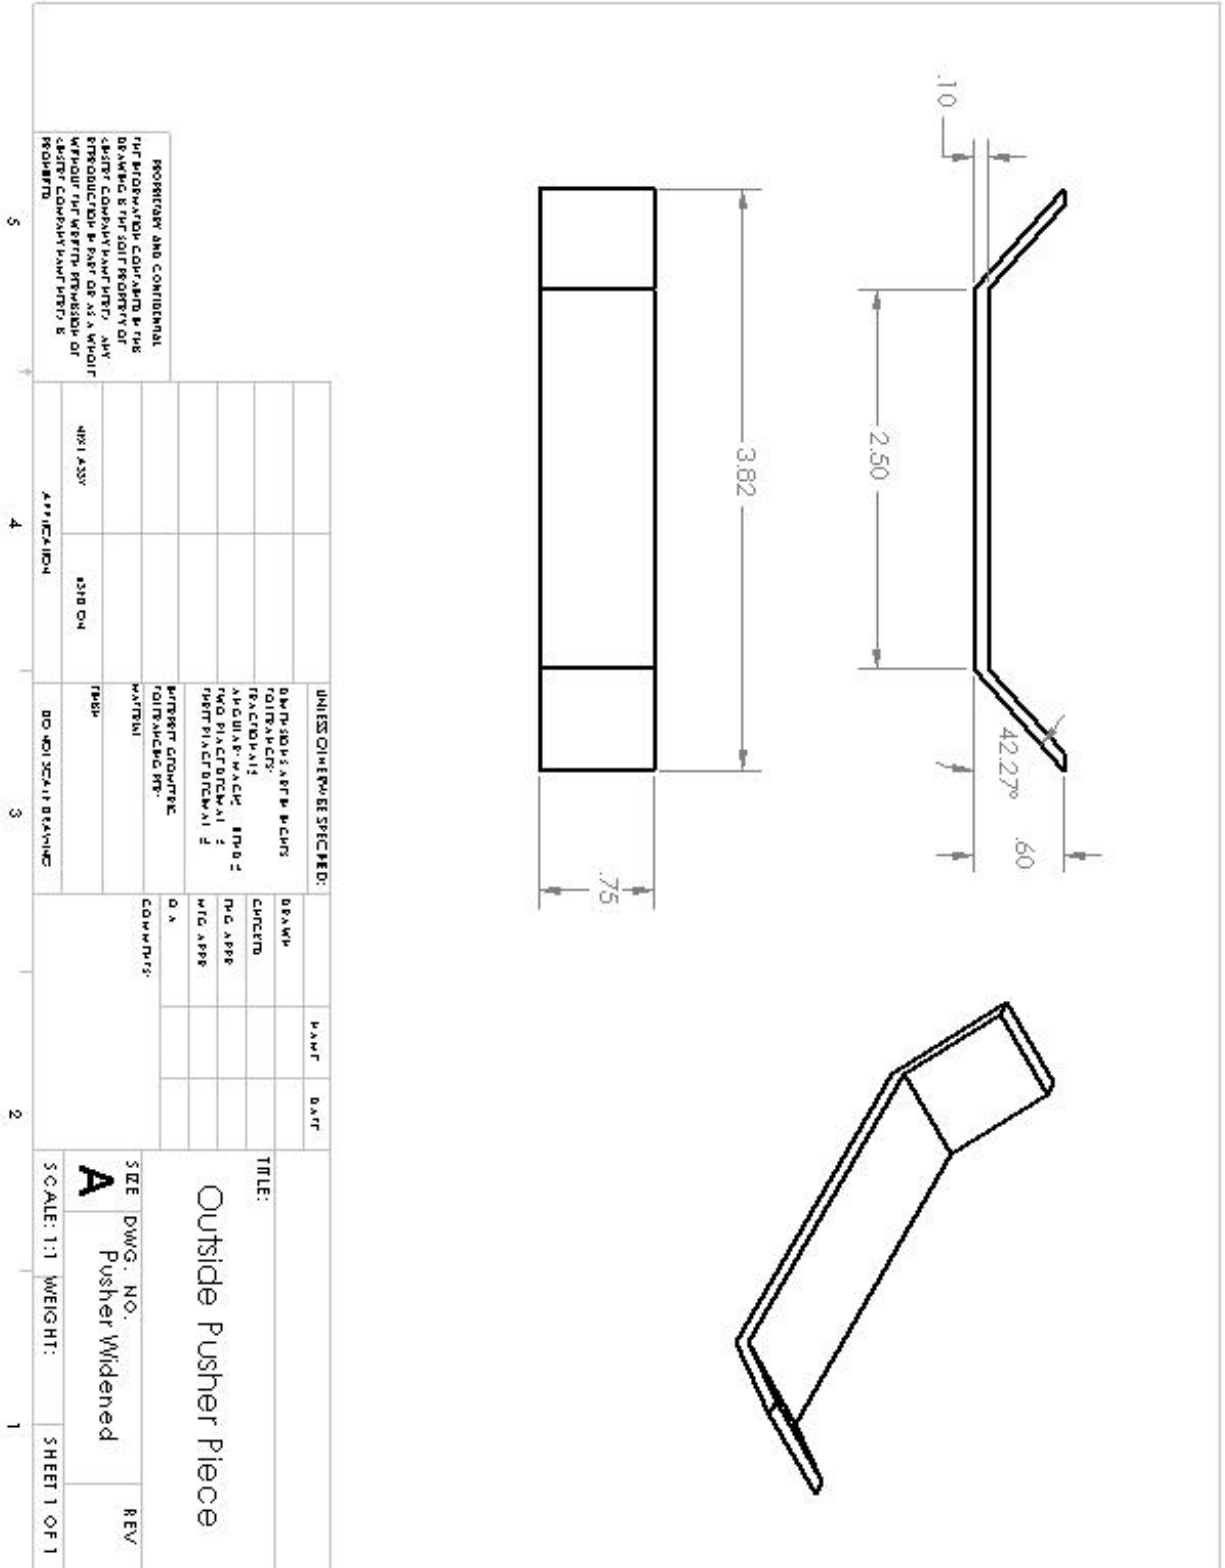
Outside Pusher Piece to distribute the actuator upward force evenly across the bottom of the slide folder stack
